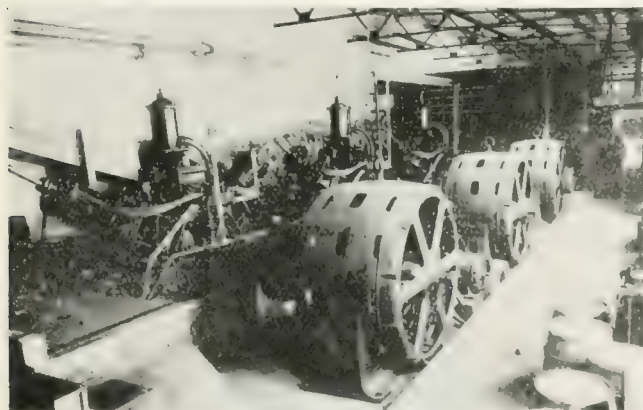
THREE PULLEY MOTOR DRIVEN GRINDERS
